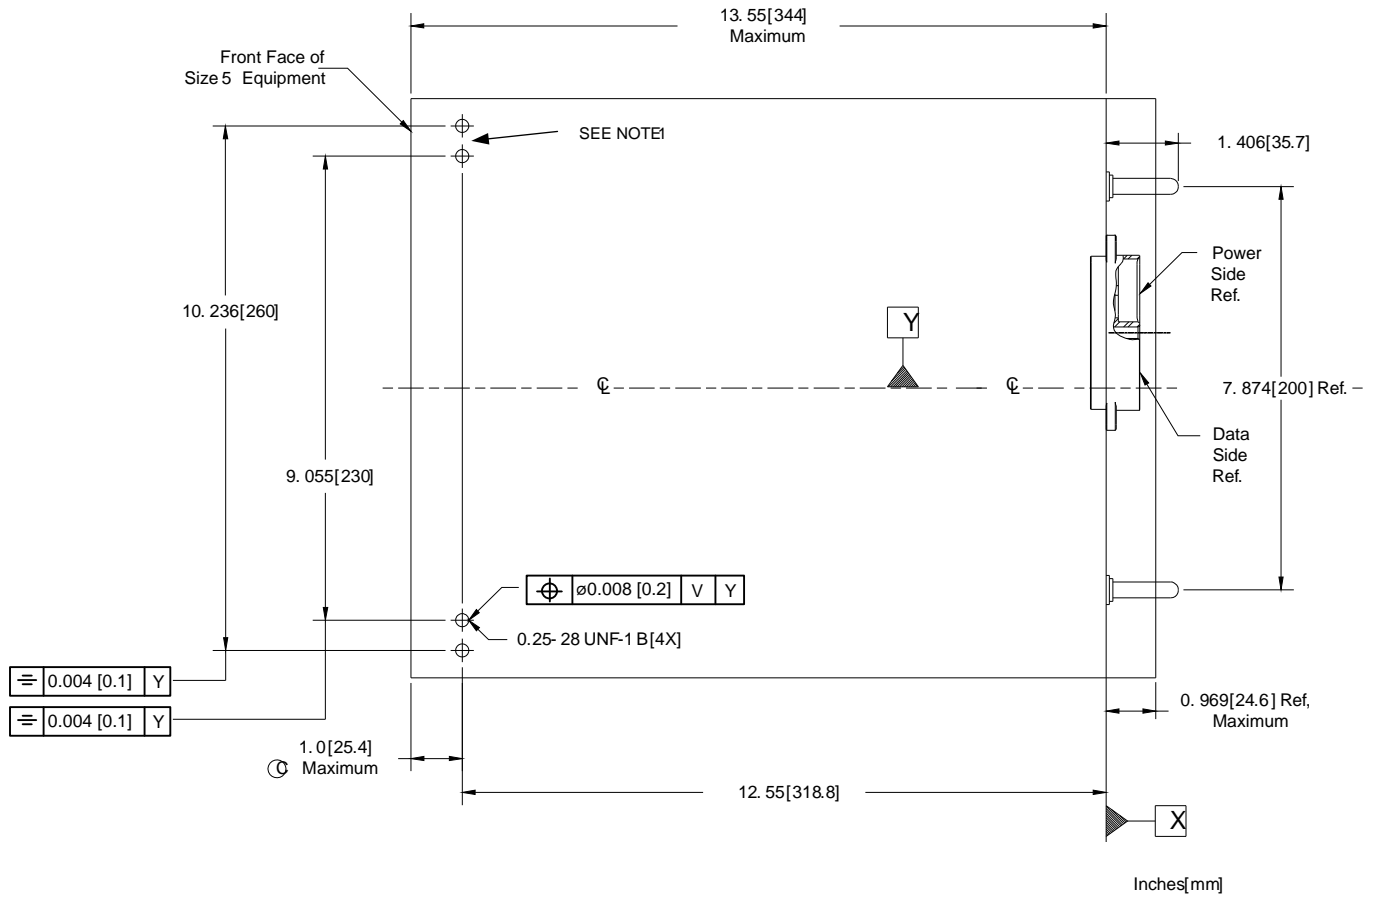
B – GAIN Size 5 Equipment Standard Dimensions Drawing – Side View
